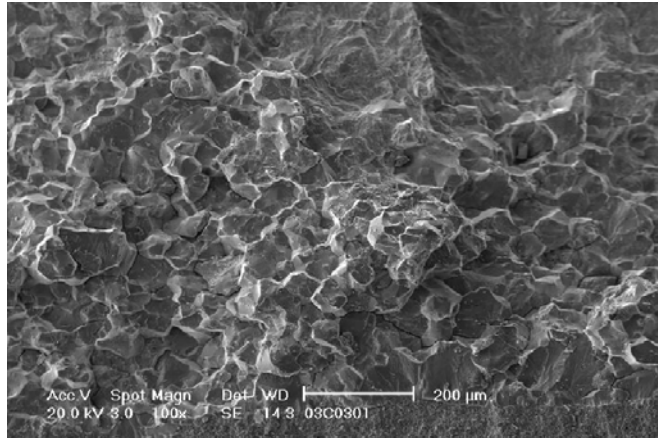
Fracture surface of 10 mm sensitized AISI 304 steel SEN(B) specimen No. 1. The fracture morphology is intergranular. Pre-fatigue crack tip can be seen in the bottom and the final post-test fatigue crack in the top of the photograph. Applied displacement rates: $5 \times 10^{-9} \text{ mm/s}$ in the beginning (after quick pre-loading) and 0 mm/s in the end of the test. Simulated BWR water, $T = 290^{\circ}\text{C}$, conductivity (outlet) = $0.25 \mu\text{S}/\text{cm}$, dissolved O_2 (outlet) = 500 ppb, $\text{ECP} = 120 \text{ mV}_{\text{SHE}}$.
